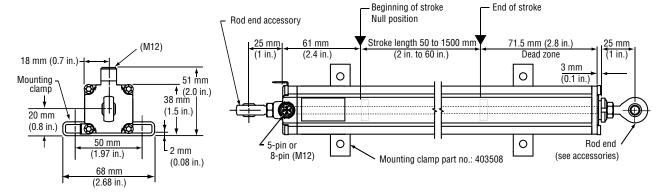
E-Series model ER rod-and cylinder sensor dimension reference
